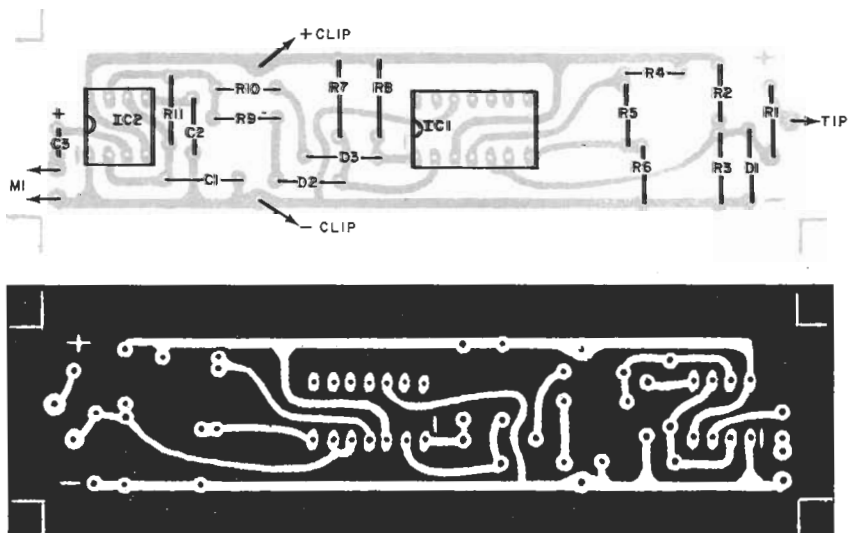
Actual-size foil pattern and component installation for printed-circuit board of suitable size for placing the probe in a tube.
